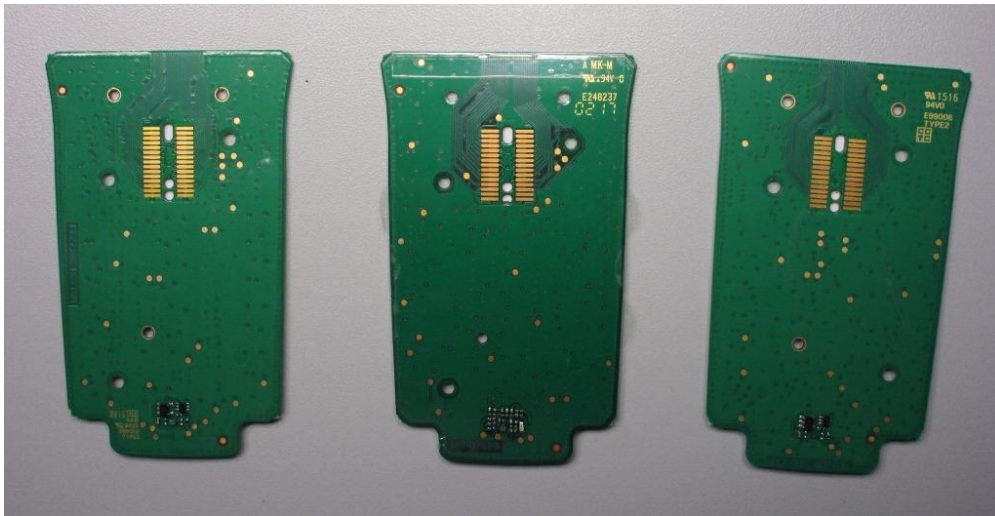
SKORPIO X4 – Handle Assembly disconnected
